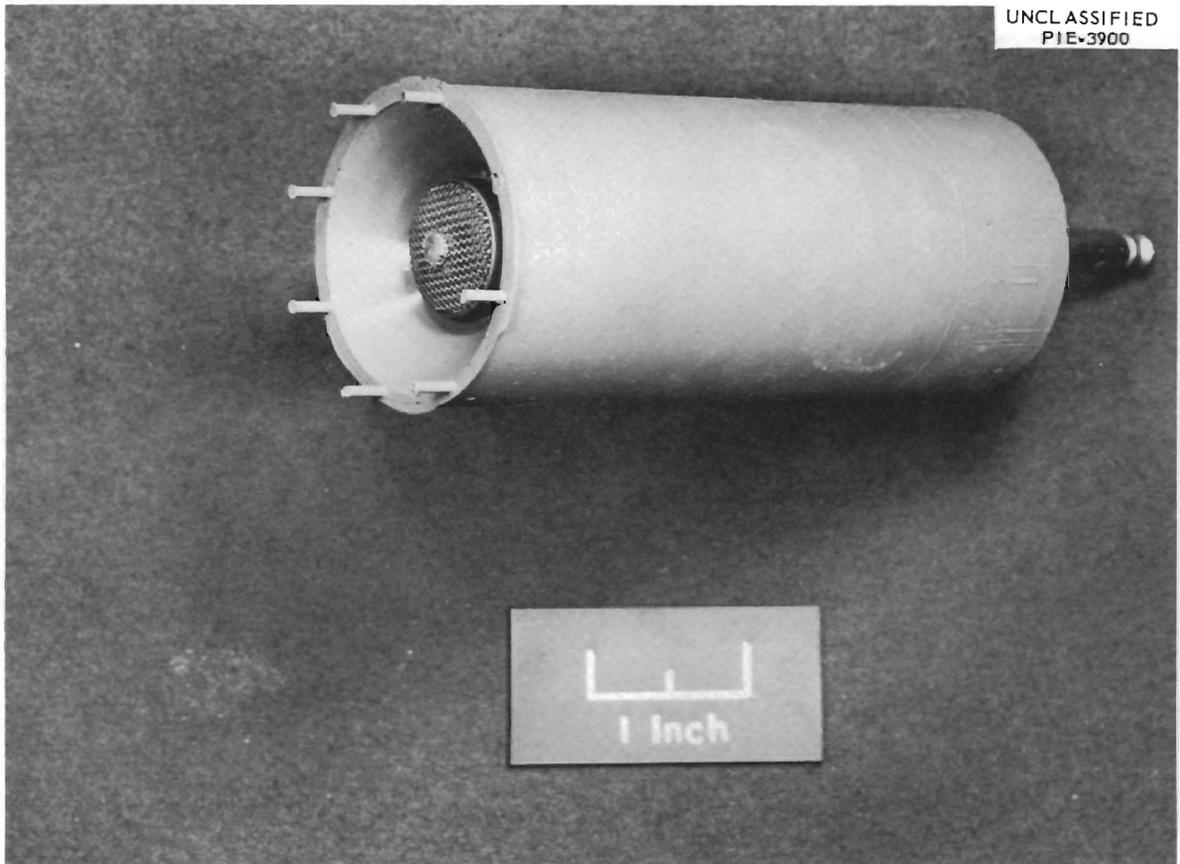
Completed Pickup Assembly After Potting in Silicone Rubber.
